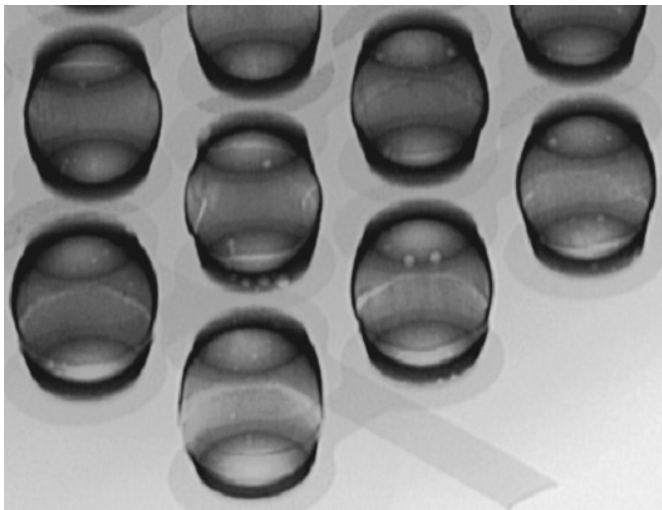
This is an oblique view x-ray image of a BGA assembled with Nickel Gold pad finish exhibiting voiding and cracks at the middle of the joint.
